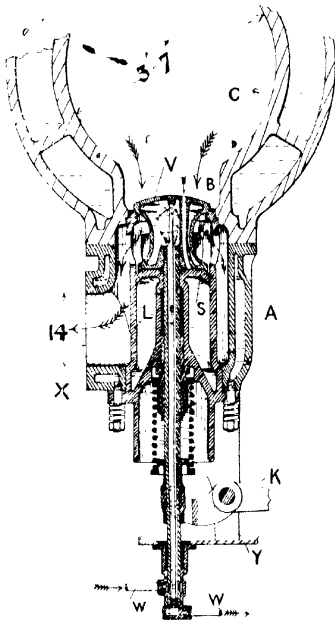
Otto-Dantz water-cooled and balanced exhaust valve
